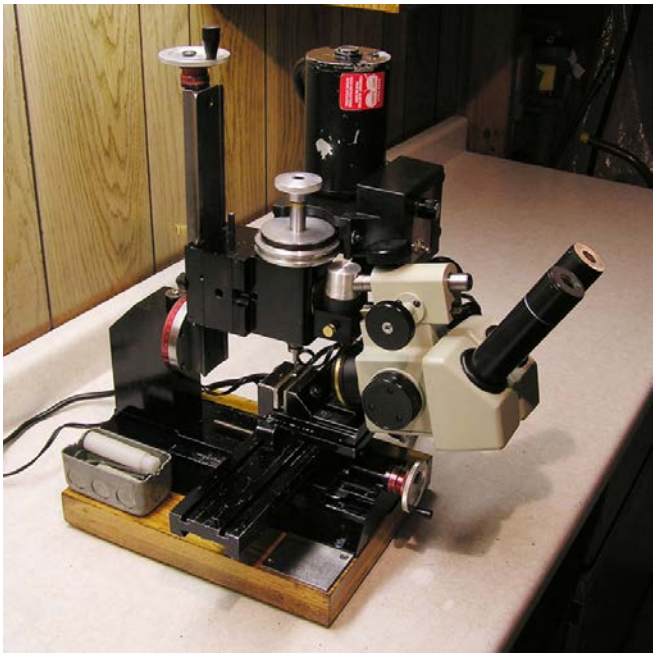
Shows a scope mounted to the milling machine in a similar manner.
